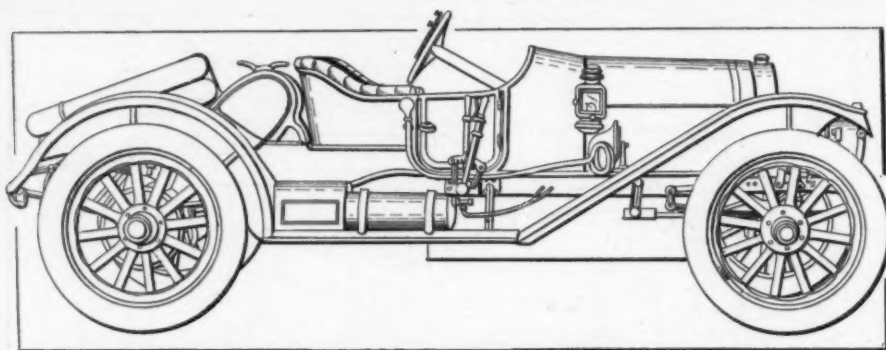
Right-hand side view of the 30-horsepower semi-racer with gas tank and tires carried on the rear platform
